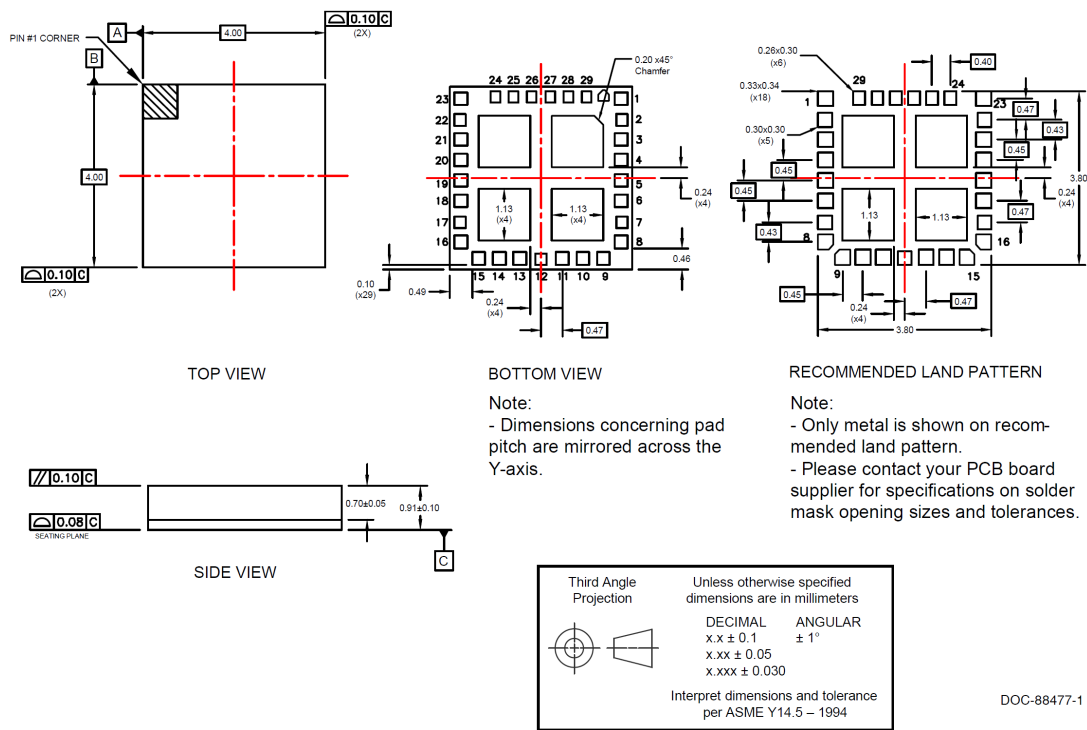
Package mechanical drawing for the 29-lead 4 × 4 mm LGA package
